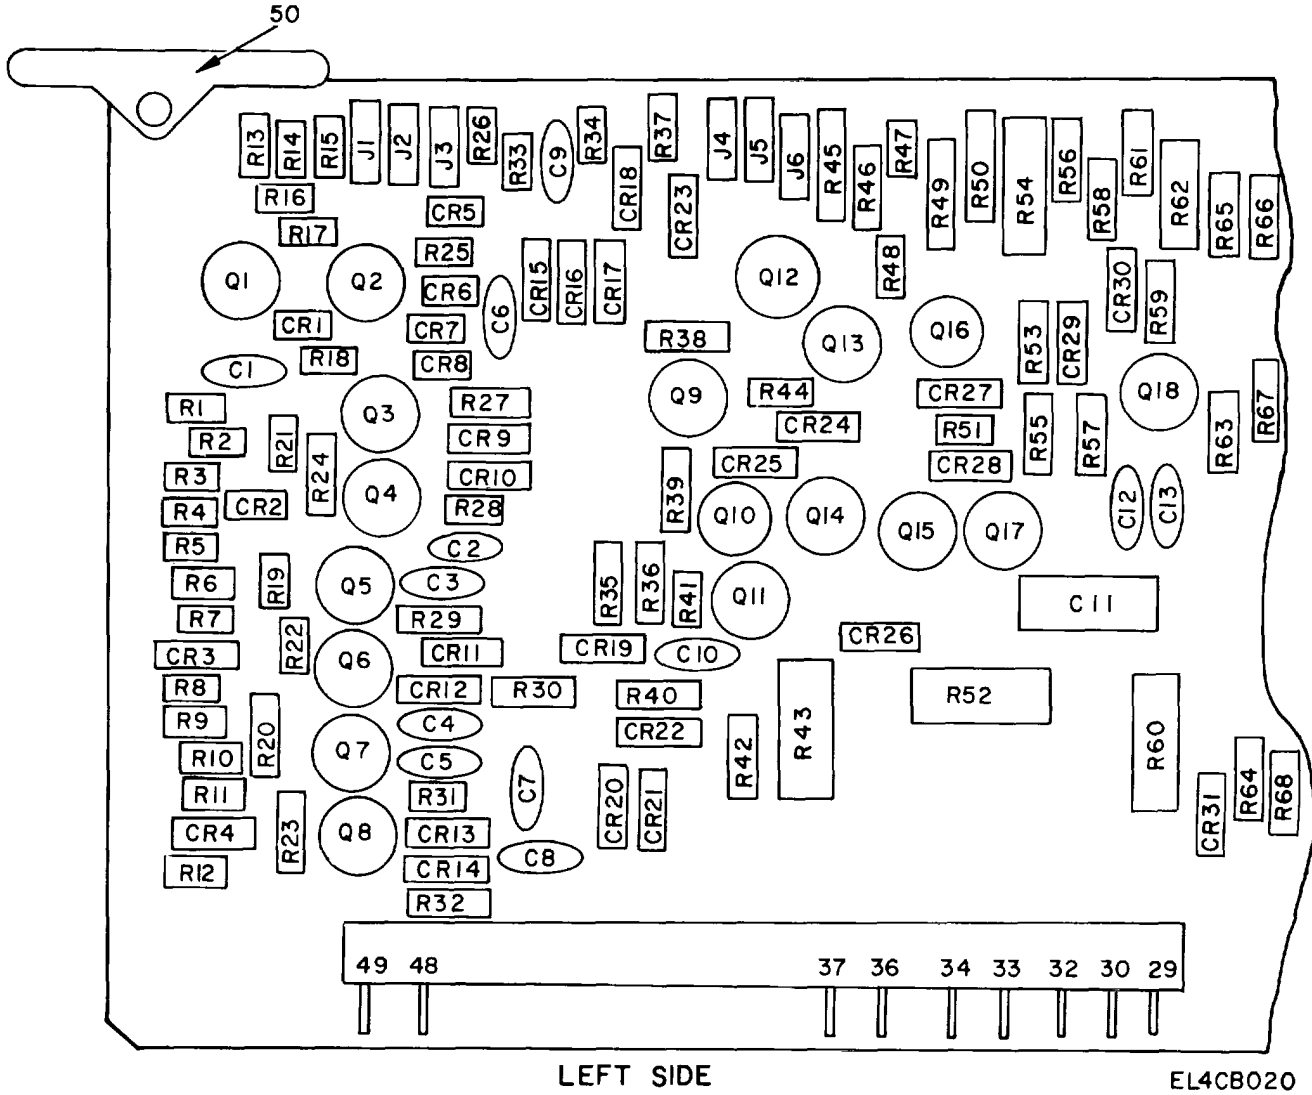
Electrical Synchronizer Subassembly PL-1123/G (Sheet 1 of 5)
